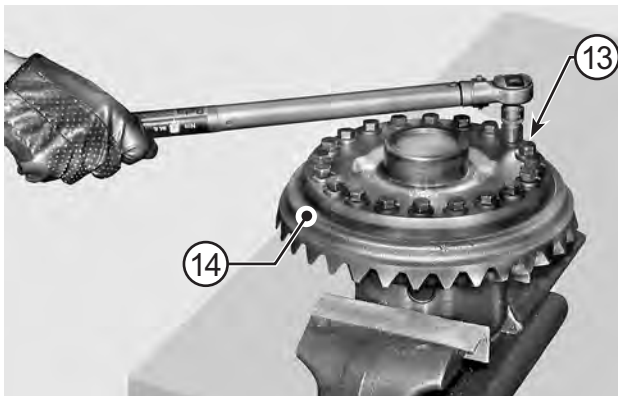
Lock the ring gear (14) by tightening the screws (13) to a torque of 115 - 142 N-m.
